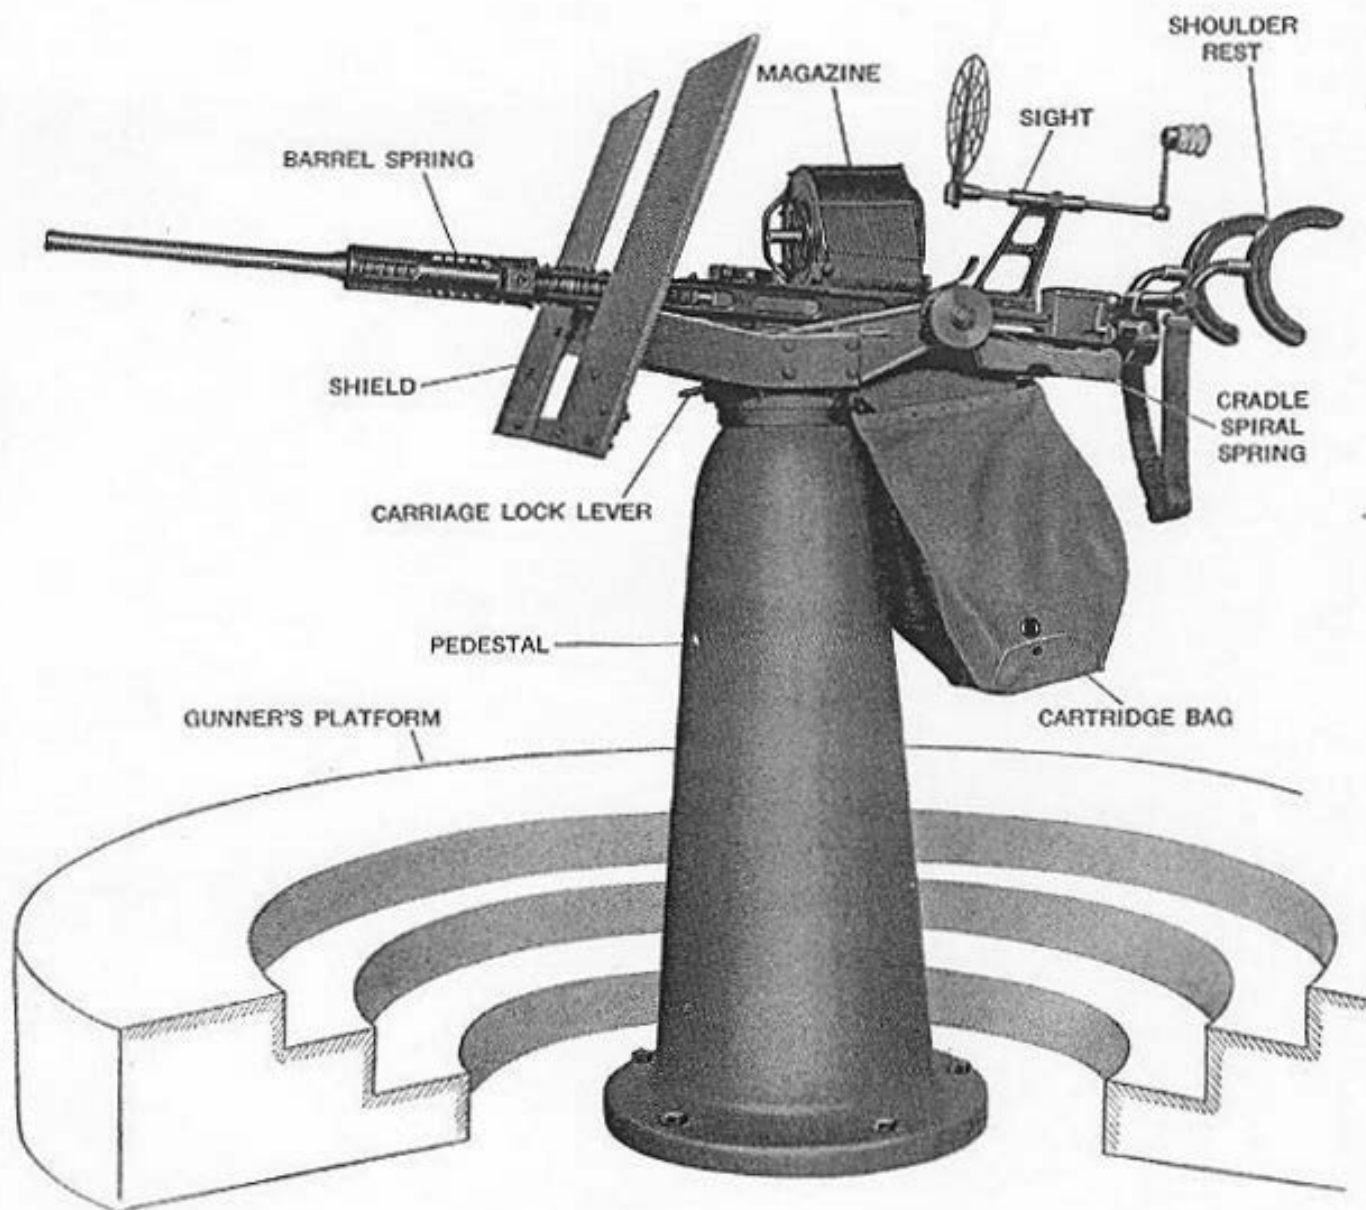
Exterior view showing general arrangement of the 20 mm. A.A. Gun and Mount Mark 5 Mod. 3.
